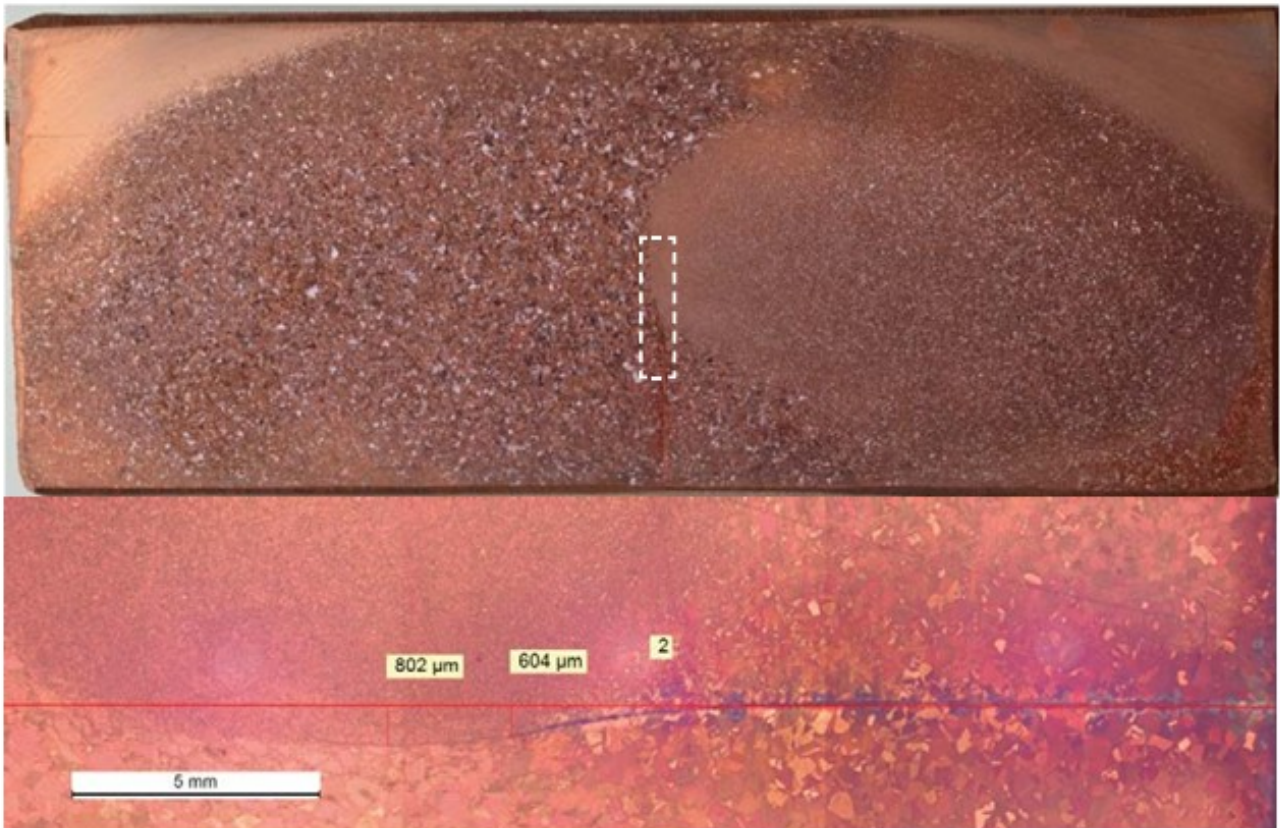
Macro sample from weld 640. The top picture shows the weld zone on the right hand side, while the bottom picture shows a zoom of the white dashed box (rotated 90° counter clockwise). A maximum depression of the vertical joint line of 0.802 mm was measured.
